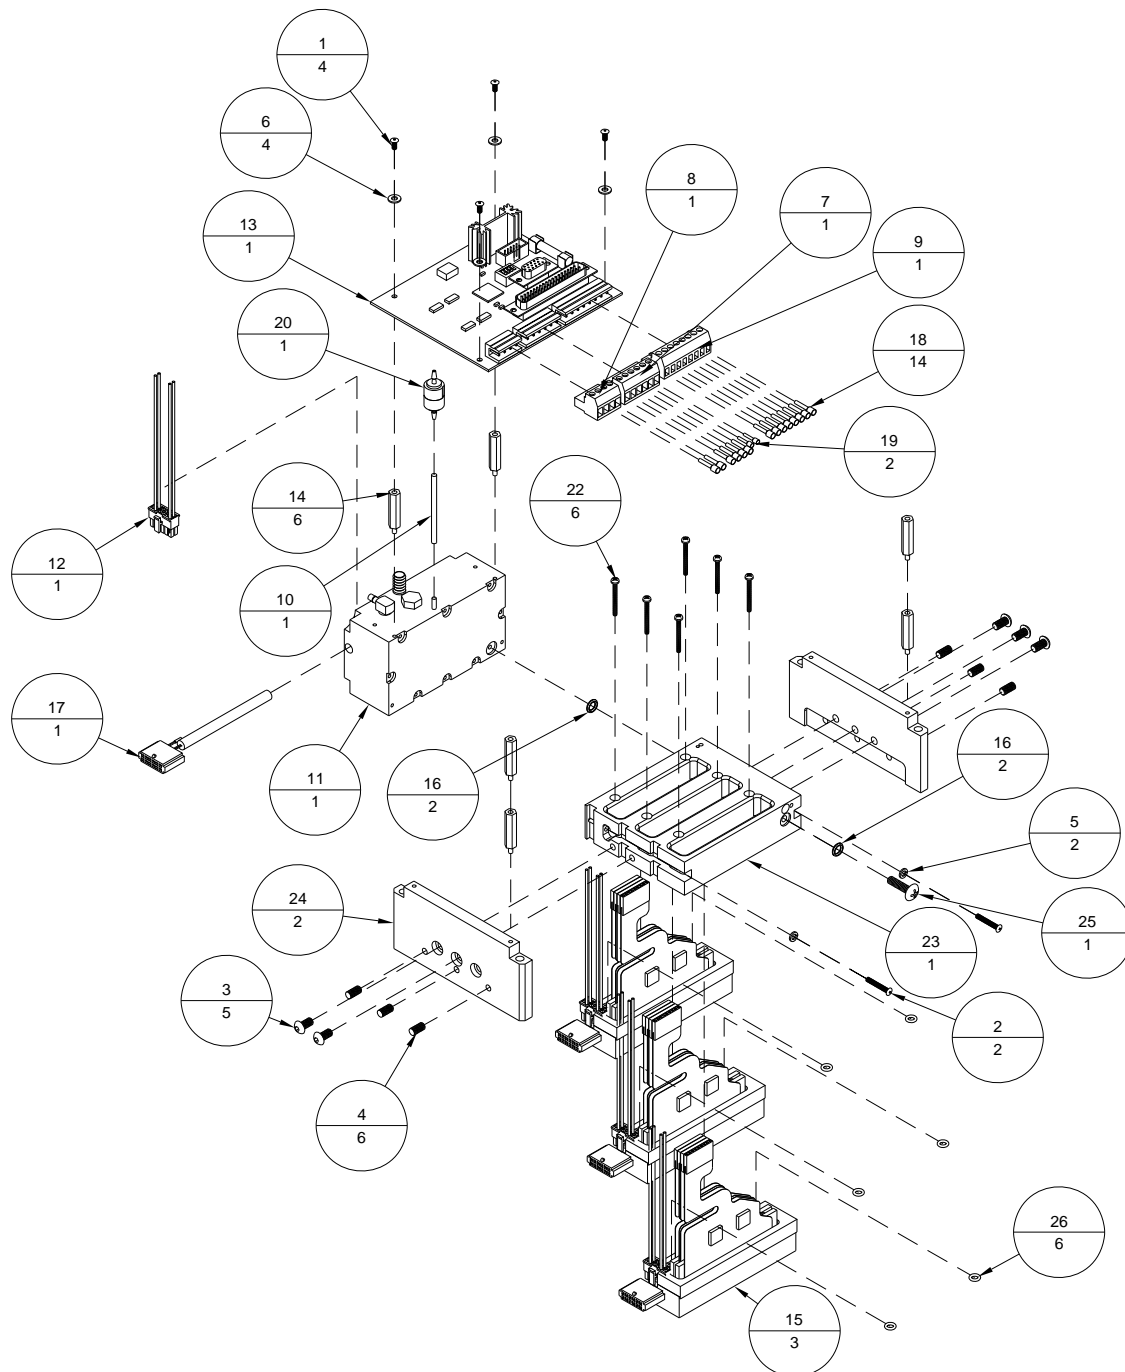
9103169A - Manifold Assembly, Adjustable, 80 pL, UV
